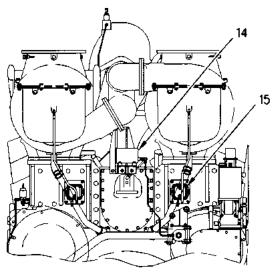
Engine Mounted Sensors Rear View (14) Fuel and air Pressure module. (15) Inlet air restriction.
